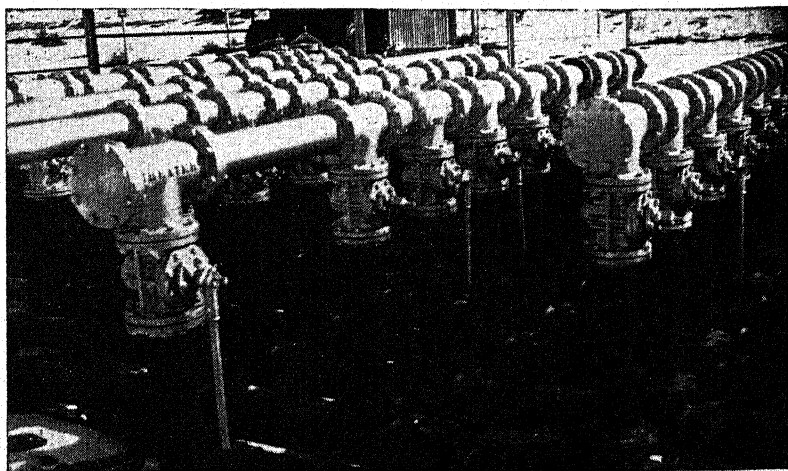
Pump header, construction of which was speeded by arc welded table chuck.
